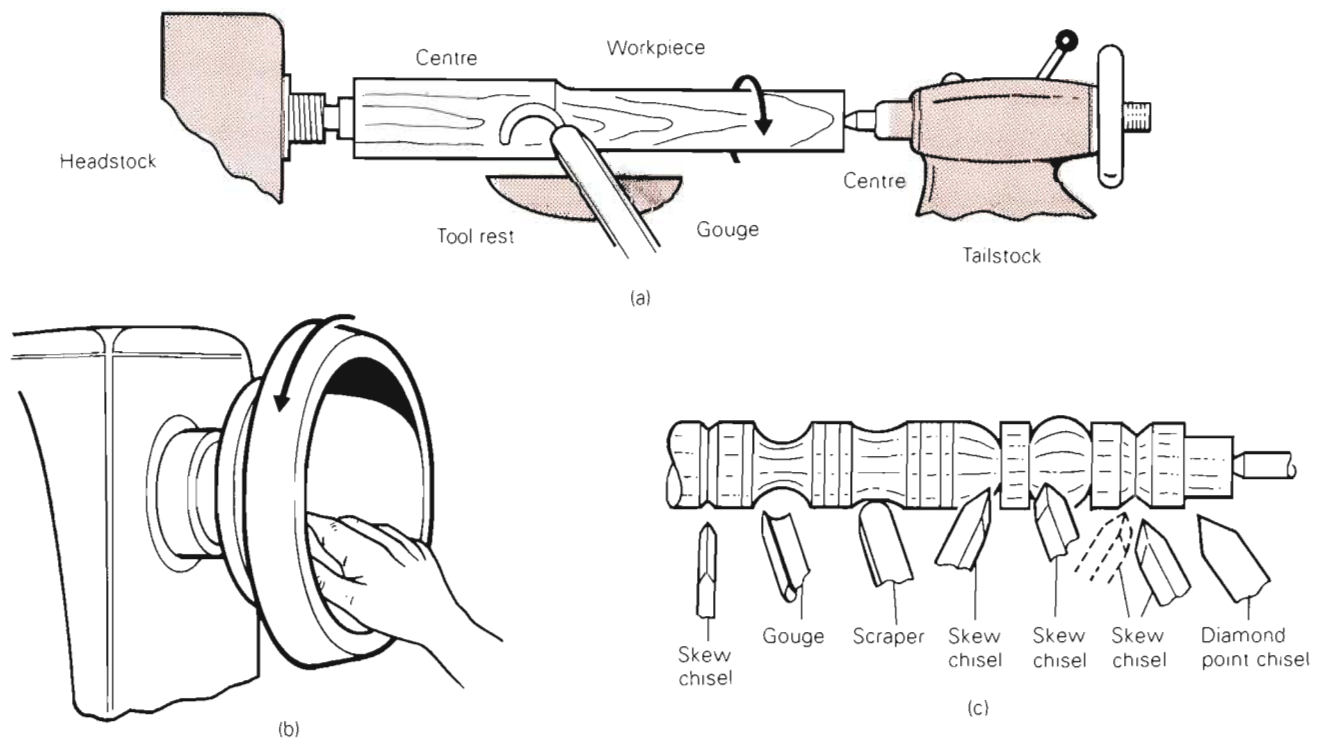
Wood turning operations: (a) spindle turning, (b) face turning, (c) applications of turning tools.
